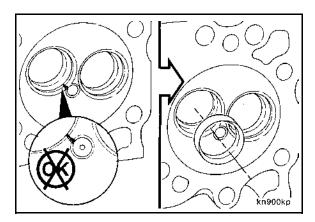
CYLINDER HEAD CRACK THAT NEEDS REPAIR
